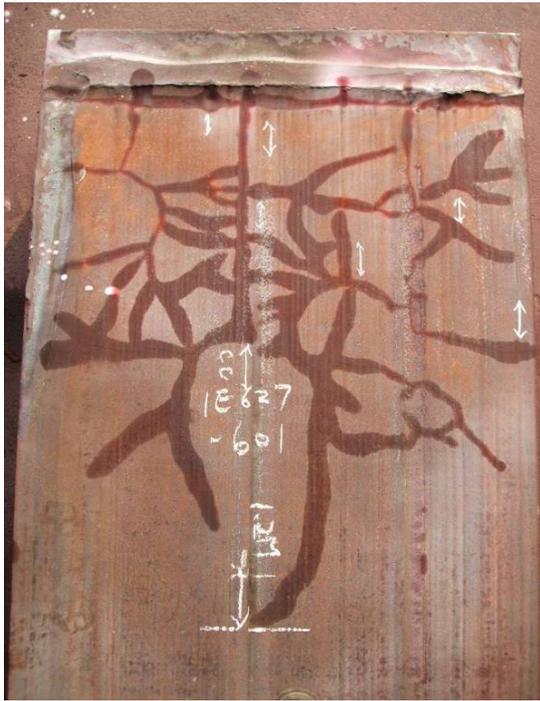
Penetration test of SK85 slab after machine scarfing.
